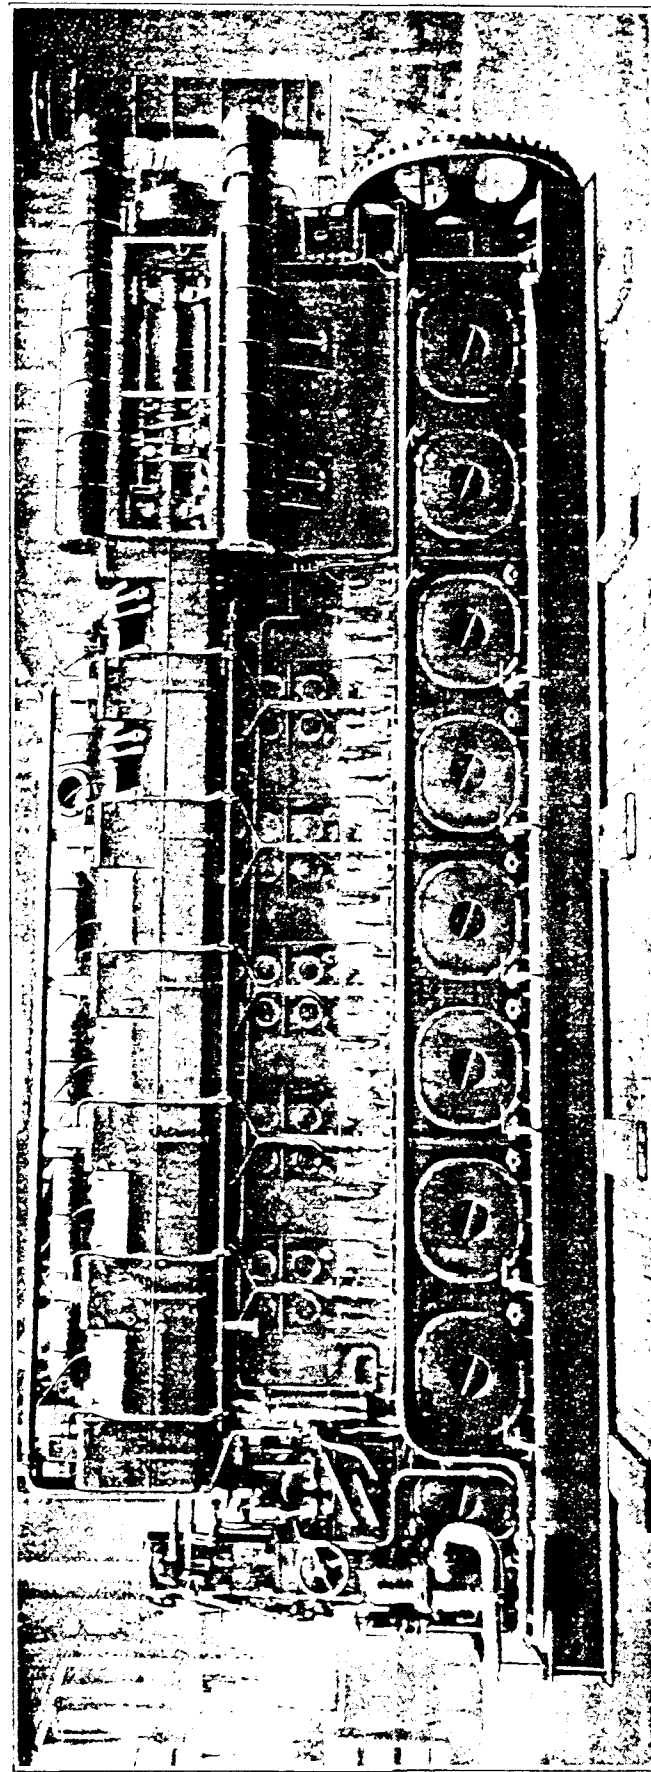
M.A.N. 1200 B.H.P. DIESEL ENGINE AND AIR-COMPRESSOR
